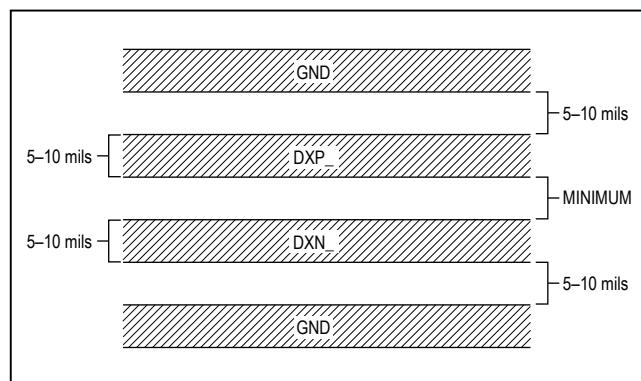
Recommended DXP_ - DXN_ PCB Traces
